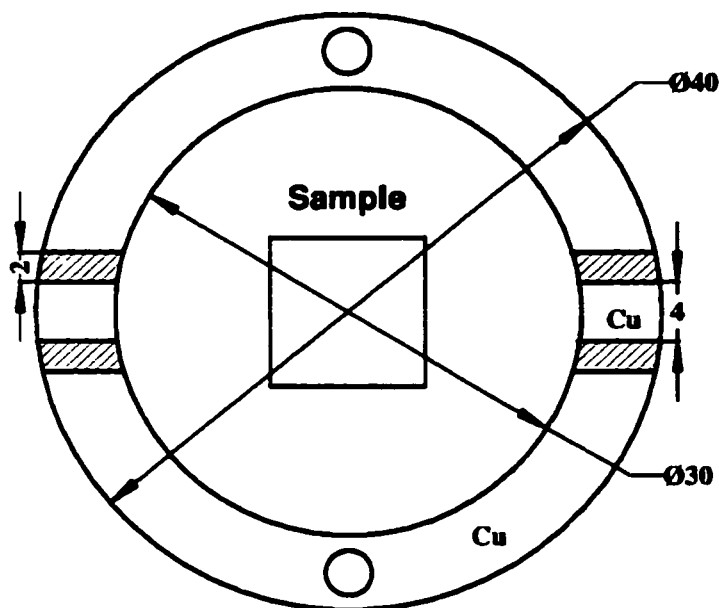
Sectional view of the anode wire mount made of 2 mm thick copper-clad circuit board. All dimensions in mm.
